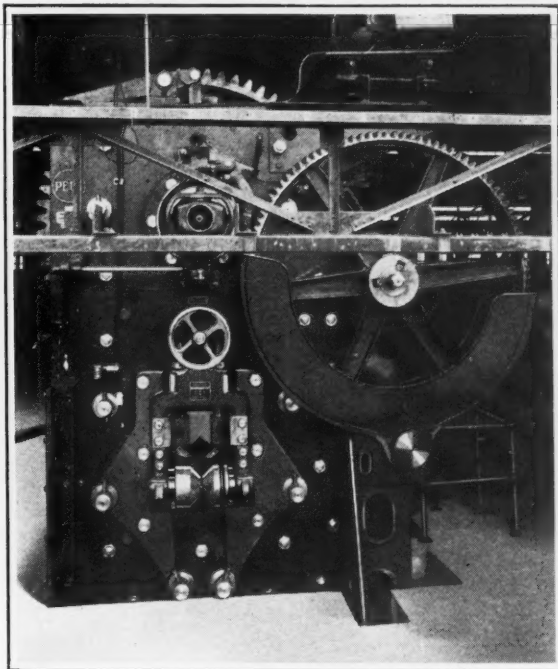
Discharge End of the Two Nut-tapping Spindles of Machine Shown in Fig. 1
